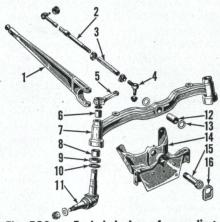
Exploded view of non-adjustable front axle and associated parts used on Utility Industrial and Grove tractors.
